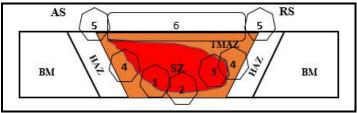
Schematic of a weld nugget produced by FSW process and its common defects' locations indicated by numbers as they follow: (1) Pores, voids and tunnel. (2) Lack of penetration. (3) Kissing bond. (4) Hooking. (5) Flash. (6) Surface defects, such as, groove, cracks and rough texture.
